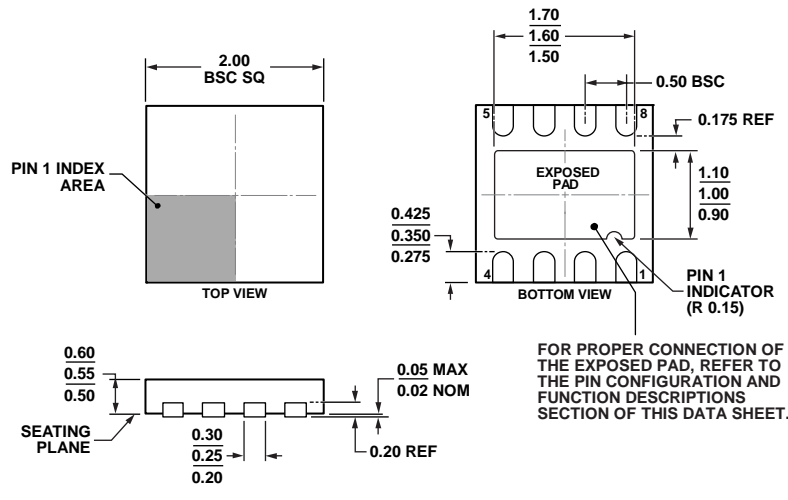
8-Lead Frame Chip Scale Package [LFCSP\_UD]
